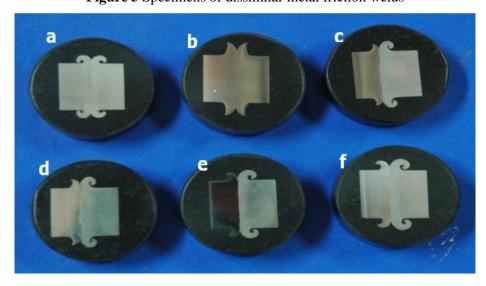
Optical macrographs of similar metal friction welds(a - low carbon steel, b - stain less steel); c, d,e,f - dissimilar metal friction welds of stainless steel and low carbon steels (c- 15-15-4, d - 15-25-4, e - 15-35-4, f - 15-45-4)
